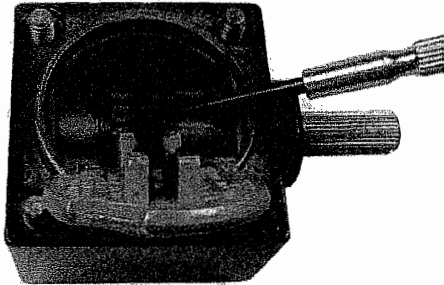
MICRO SWITCH™ HDLS Side Rotary Actuator Head Terminology
